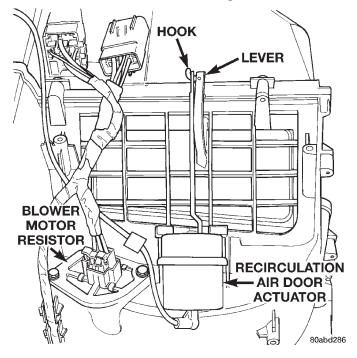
Recirculation Air Door Vacuum Actuator Remove/Install
